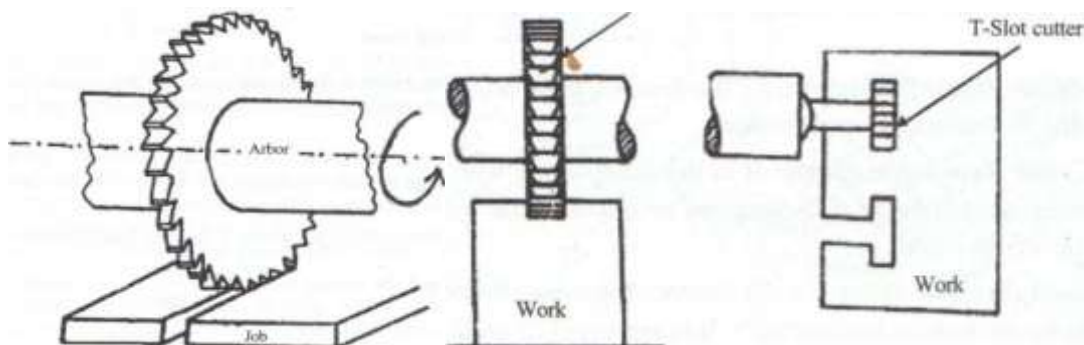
Saw Milling Fig. 1.63: Keyway Milling
